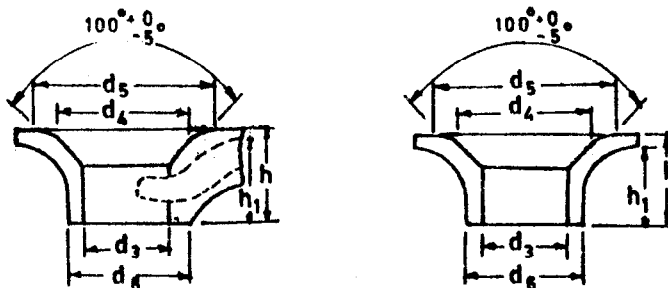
DETAILS OF WASTE HOLES FOR KITCHEN AND LABORATORY SINKS
